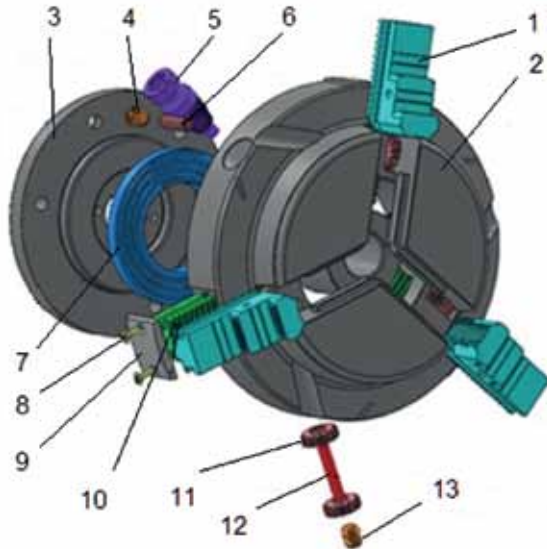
Lathe Chuck – 3D CAD Model. [13]. 1 – jaw, 2 – chuck body, 3 – chuck back, 4 – pin locking screw, 5 – pinion, 6 – pin, 7 – scroll plate, 8 – fastening screw, 9 – cover counterweight, 10 – counterweight, 11 – gear, 12 – shaft of gear, 13 – shaft screw
